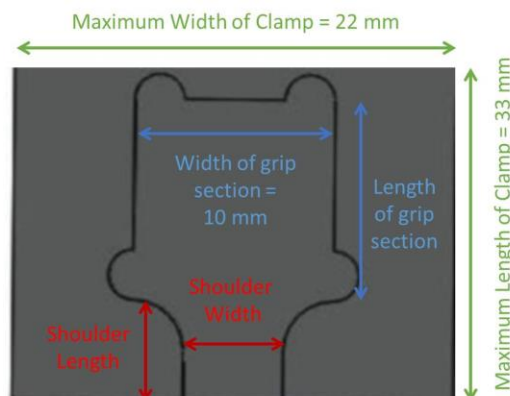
The cut out geometry designed to hold the specimen within the clamps.
